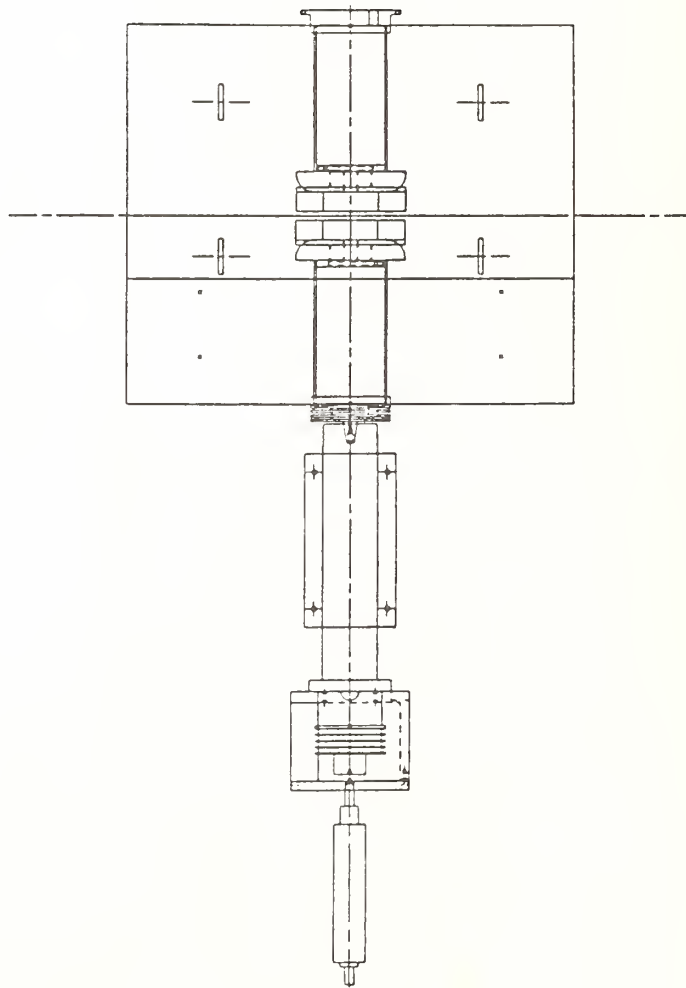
Design Layout - Upper and Lower Assemblies and Furnace
